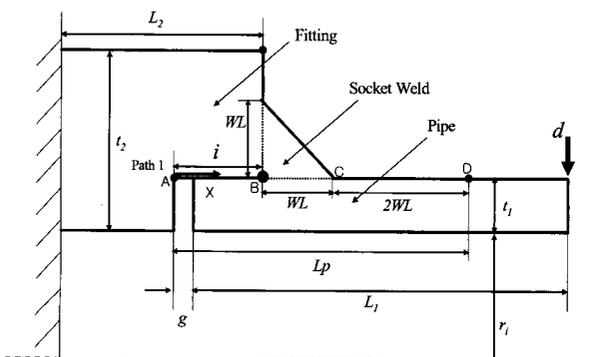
Geometry of Socket Weld with Pipe and Fitting
